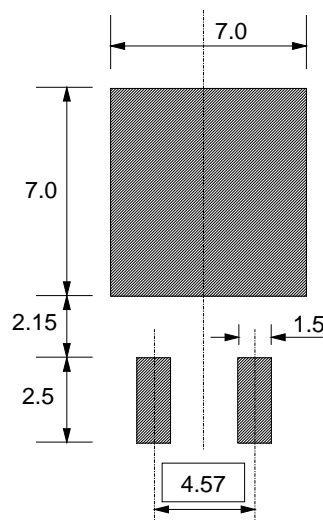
SOT428 : minimum pad sizes for surface mounting.
